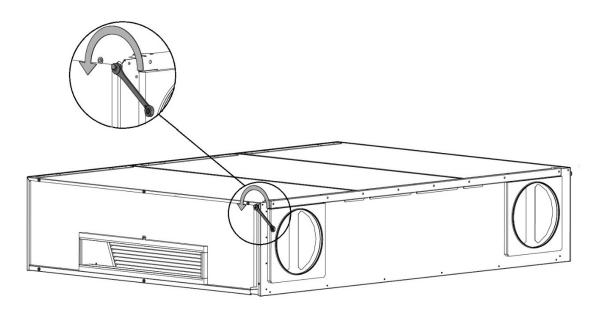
Disassemble the rear bracket, left-hand side seen from behind
